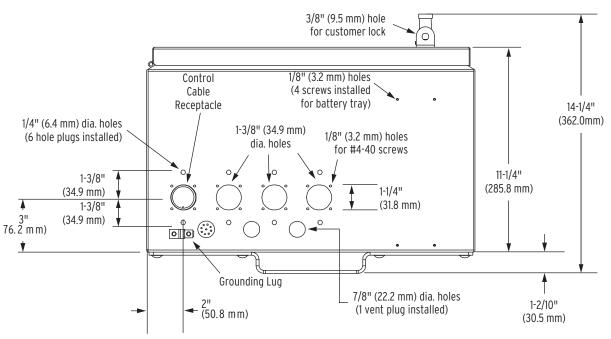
SEL-351R Recloser Control Grounding Lug Location and Other Dimensional Information (bottom view)
